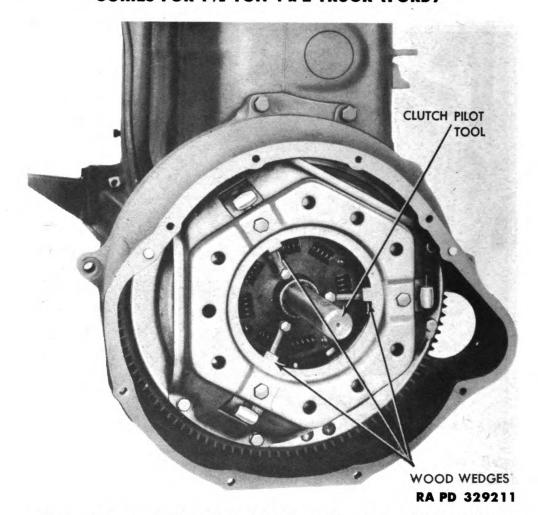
Installing Clutch Disk and Pressure Plate With Tool (41-T-3085)
